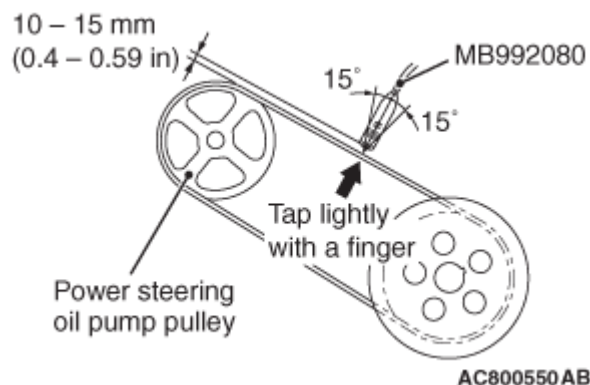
Checking Tension Of Drive Belt Using Special Tool MB992080
